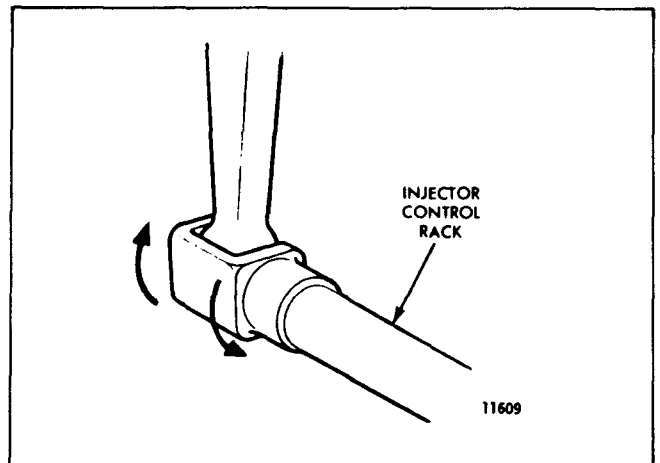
Checking Rotating Movement of Injector Control Rack
